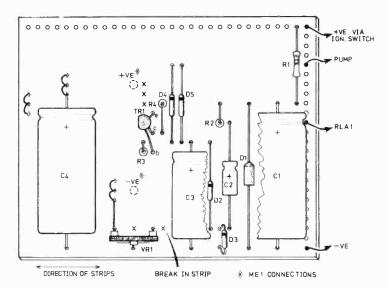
Layout of the components on the Veroboard. This panel is mounted directly on the meter. Holes should be drilled to suit meter
